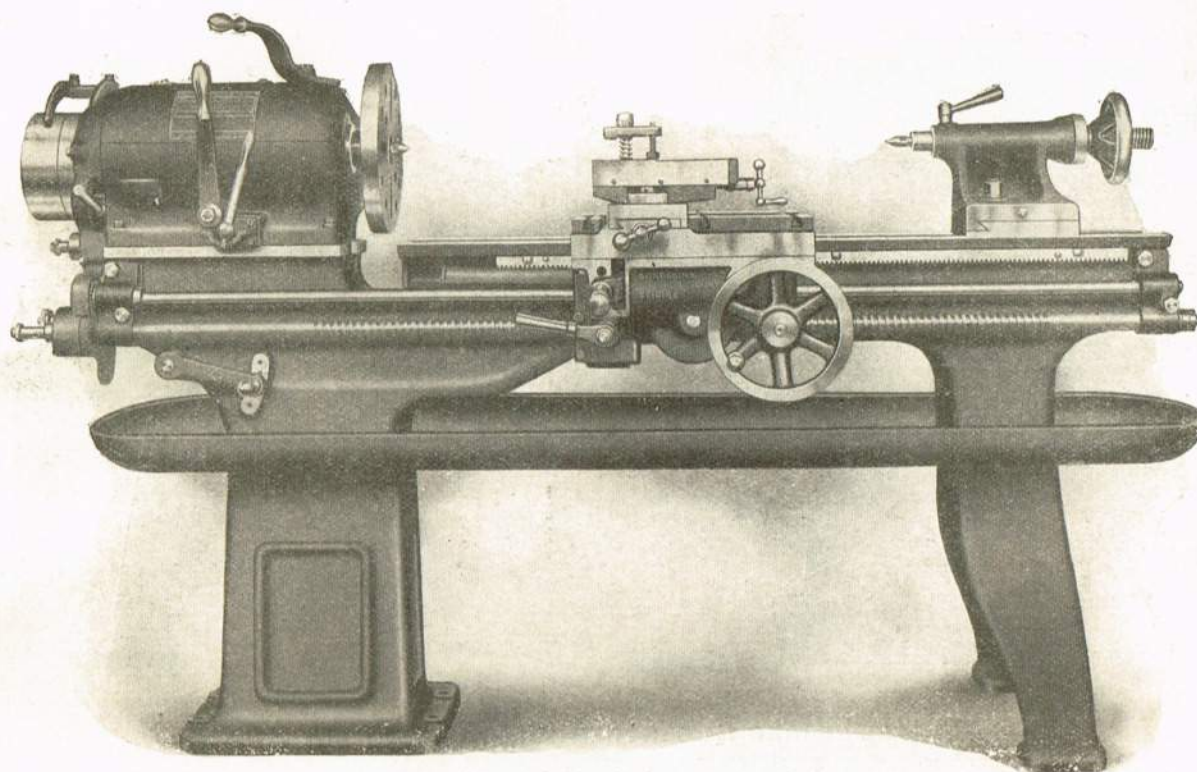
6½" CENTRE ALL-GEARED HEAD LATHE.
